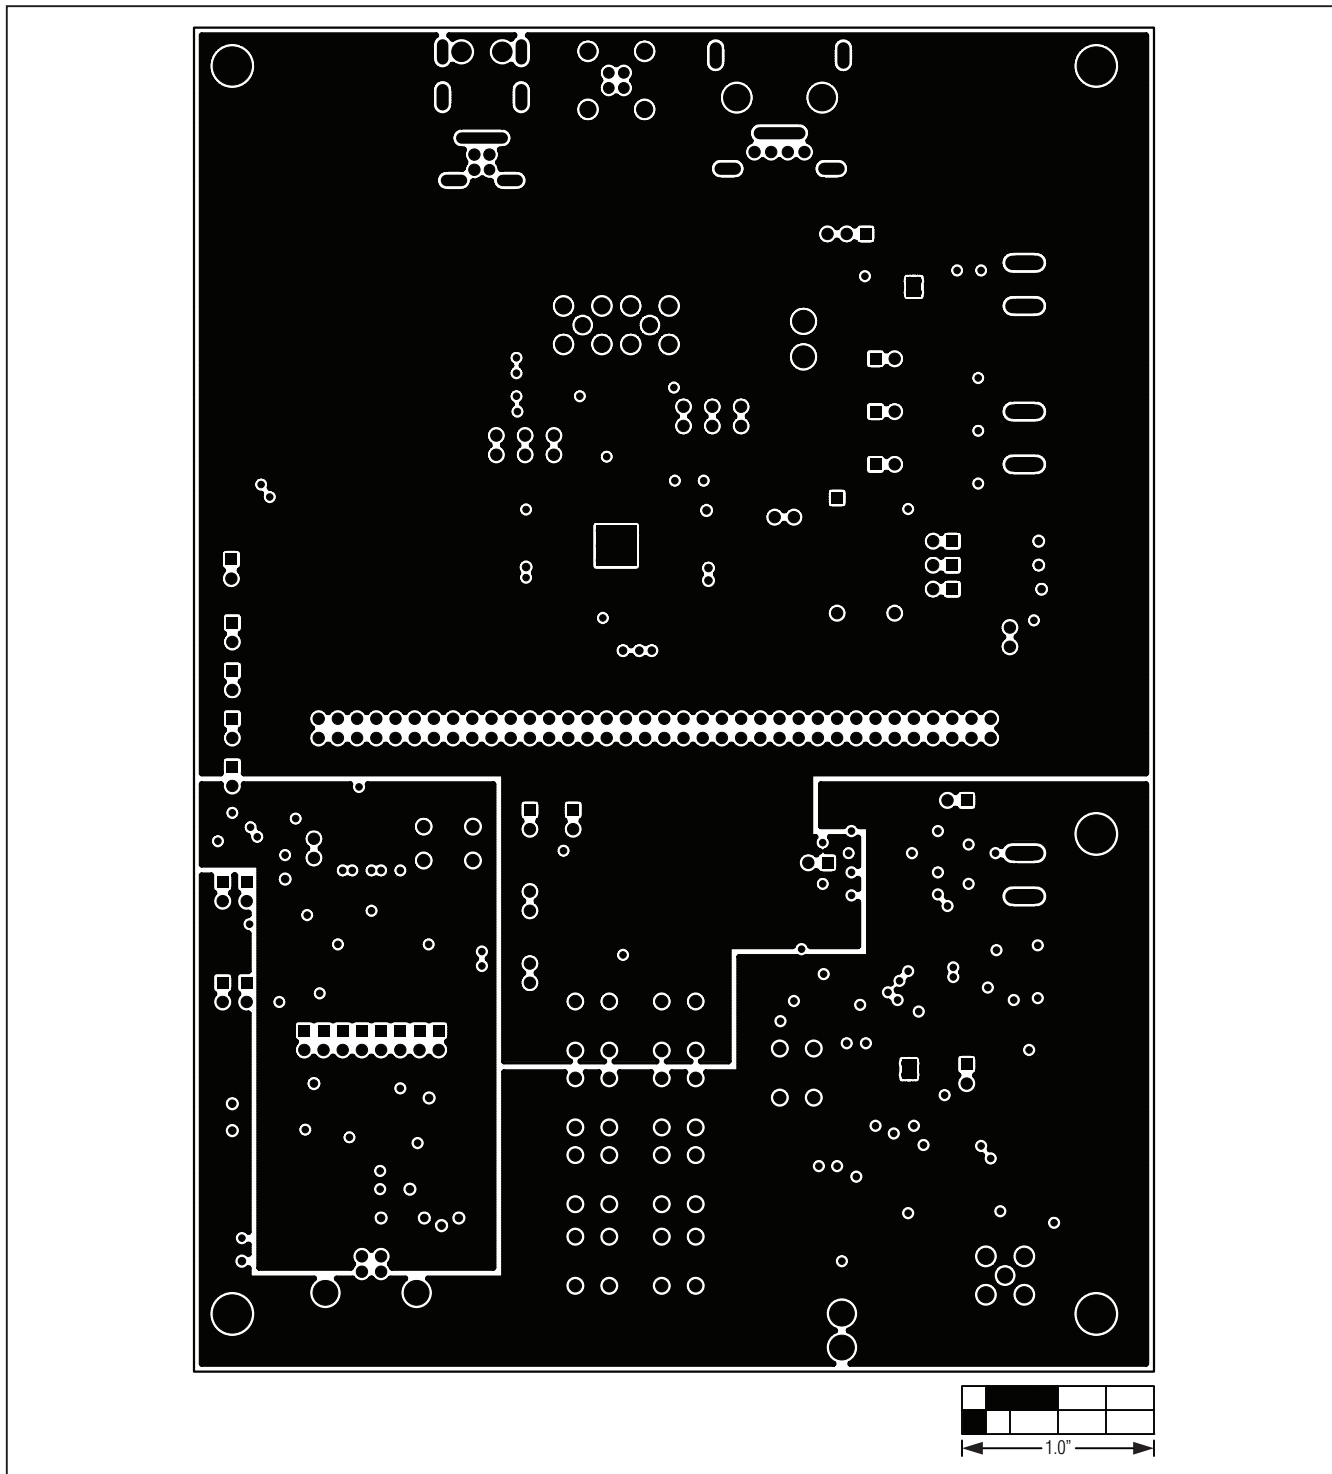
MAX9259 EV Kit PCB Layout—Power Layer 3
